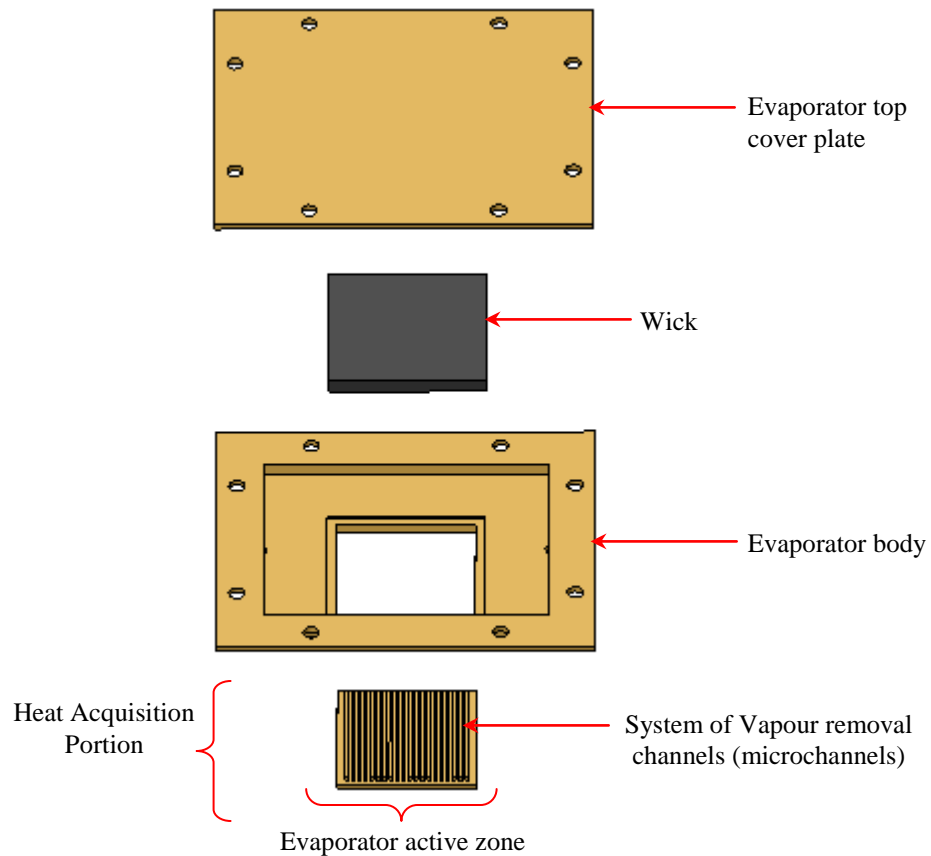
Exploded view of the capillary evaporator showing the parts
